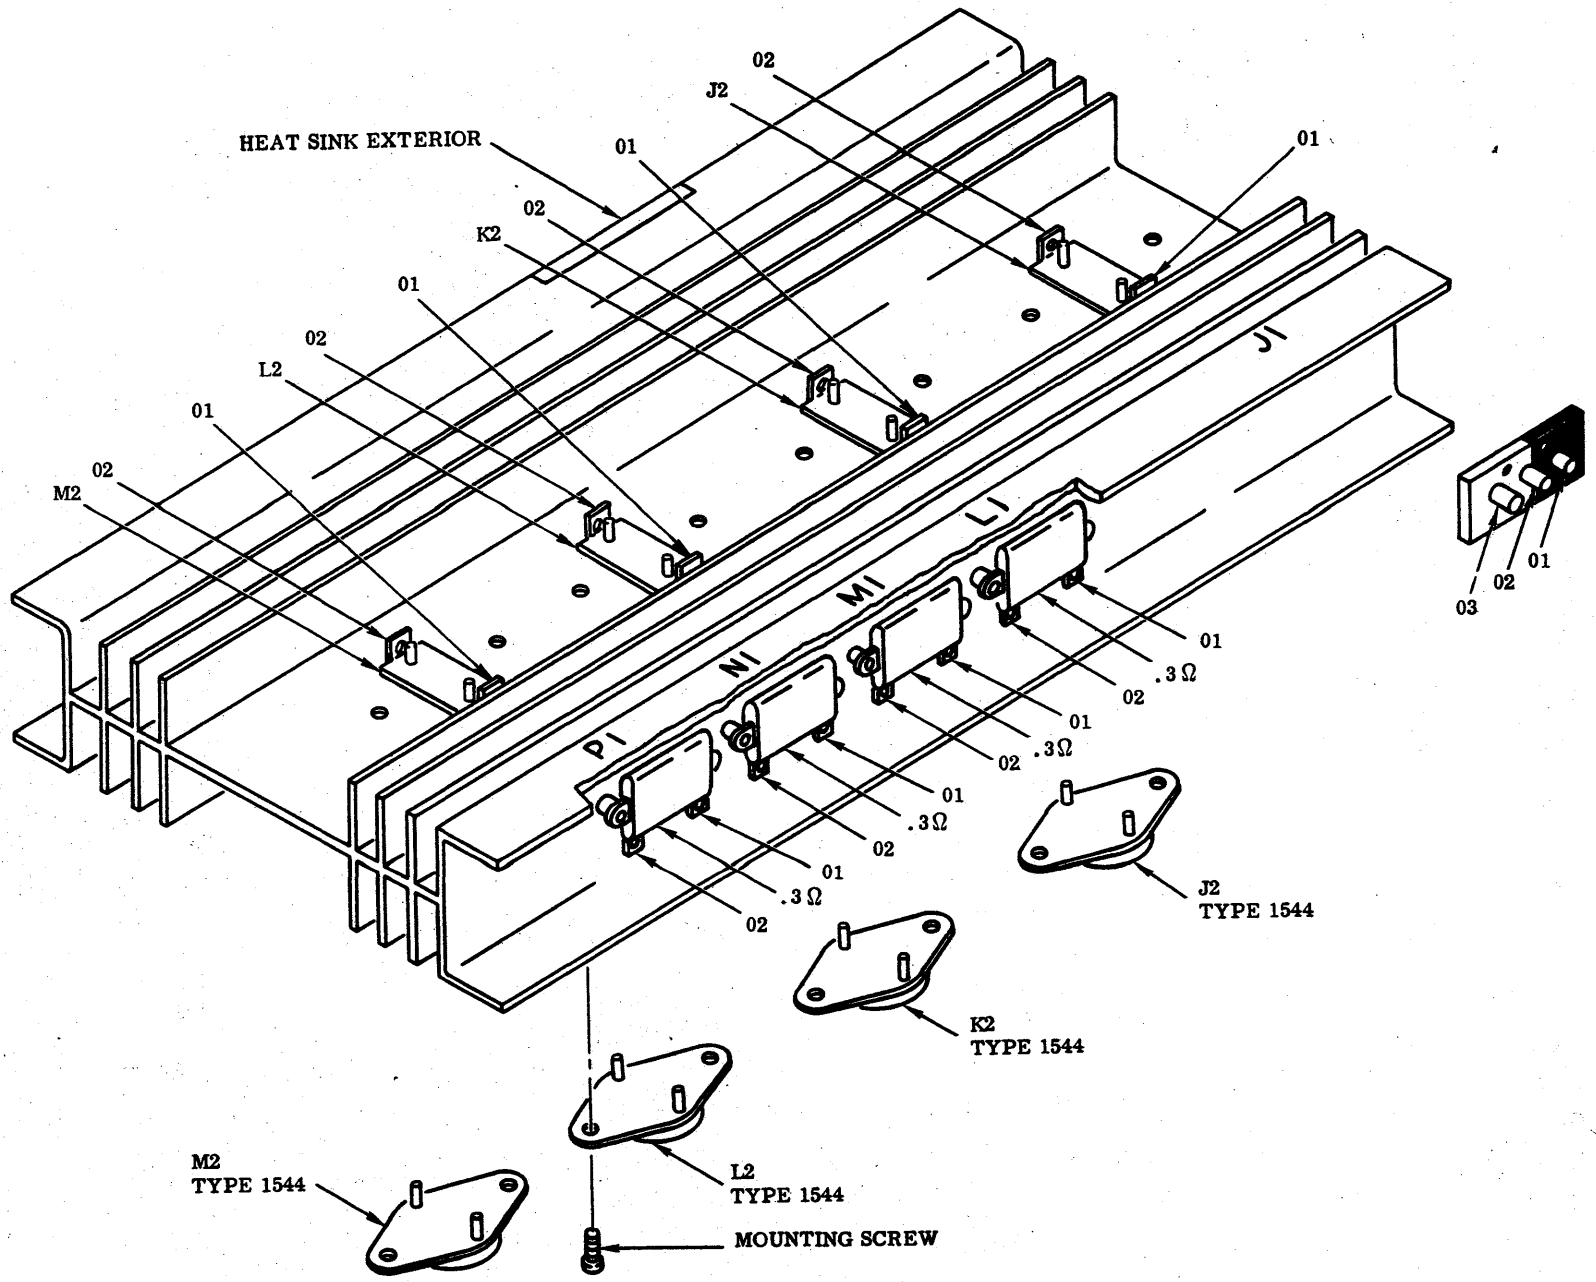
HEATSINK ASSEMBLY #11896313 (TYPE 4)
